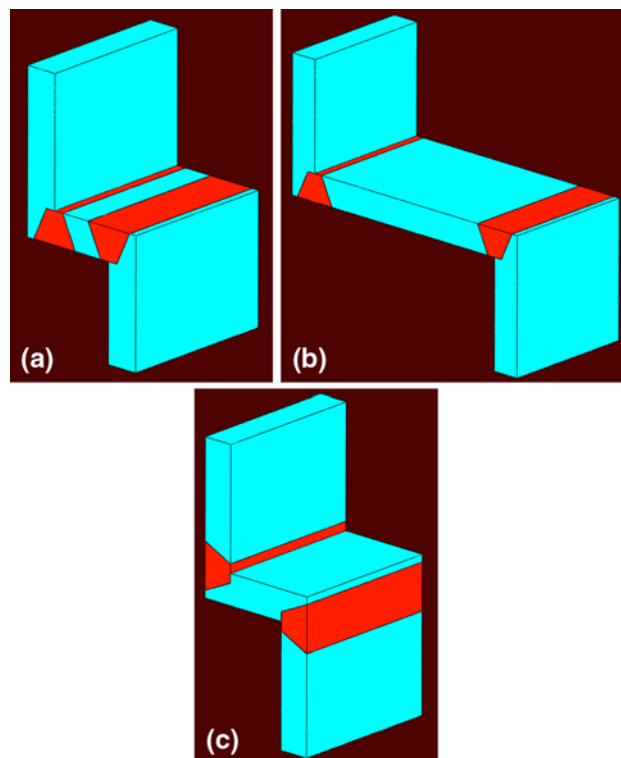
(a) Original weldment design which may be difficult to fabricate due to lack of weld-region accessibility by the FSW tool; (b, c) two potential modified designs
